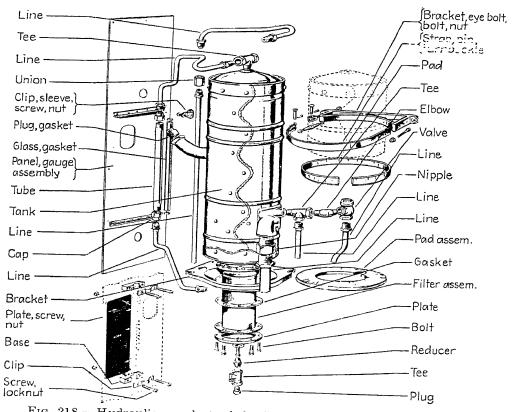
Hydraulic supply tank for Douglas DC-3. Panel assembly.
